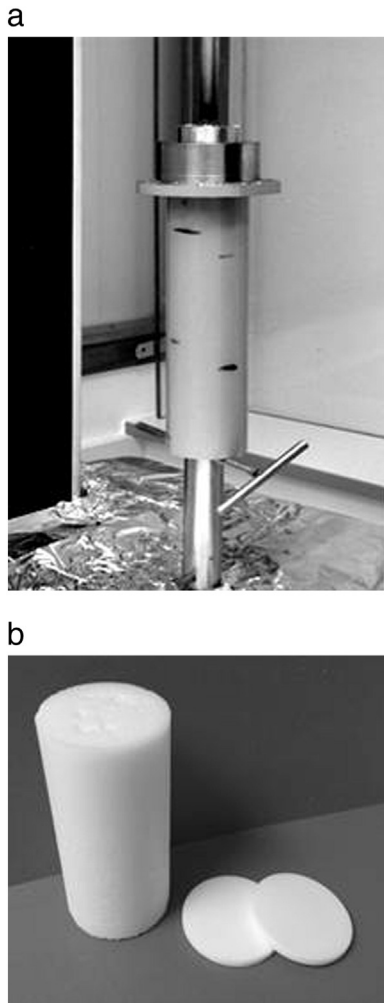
a) Compression mold to form the sample; b) Compressed sample with Teflon disks used during compression.
